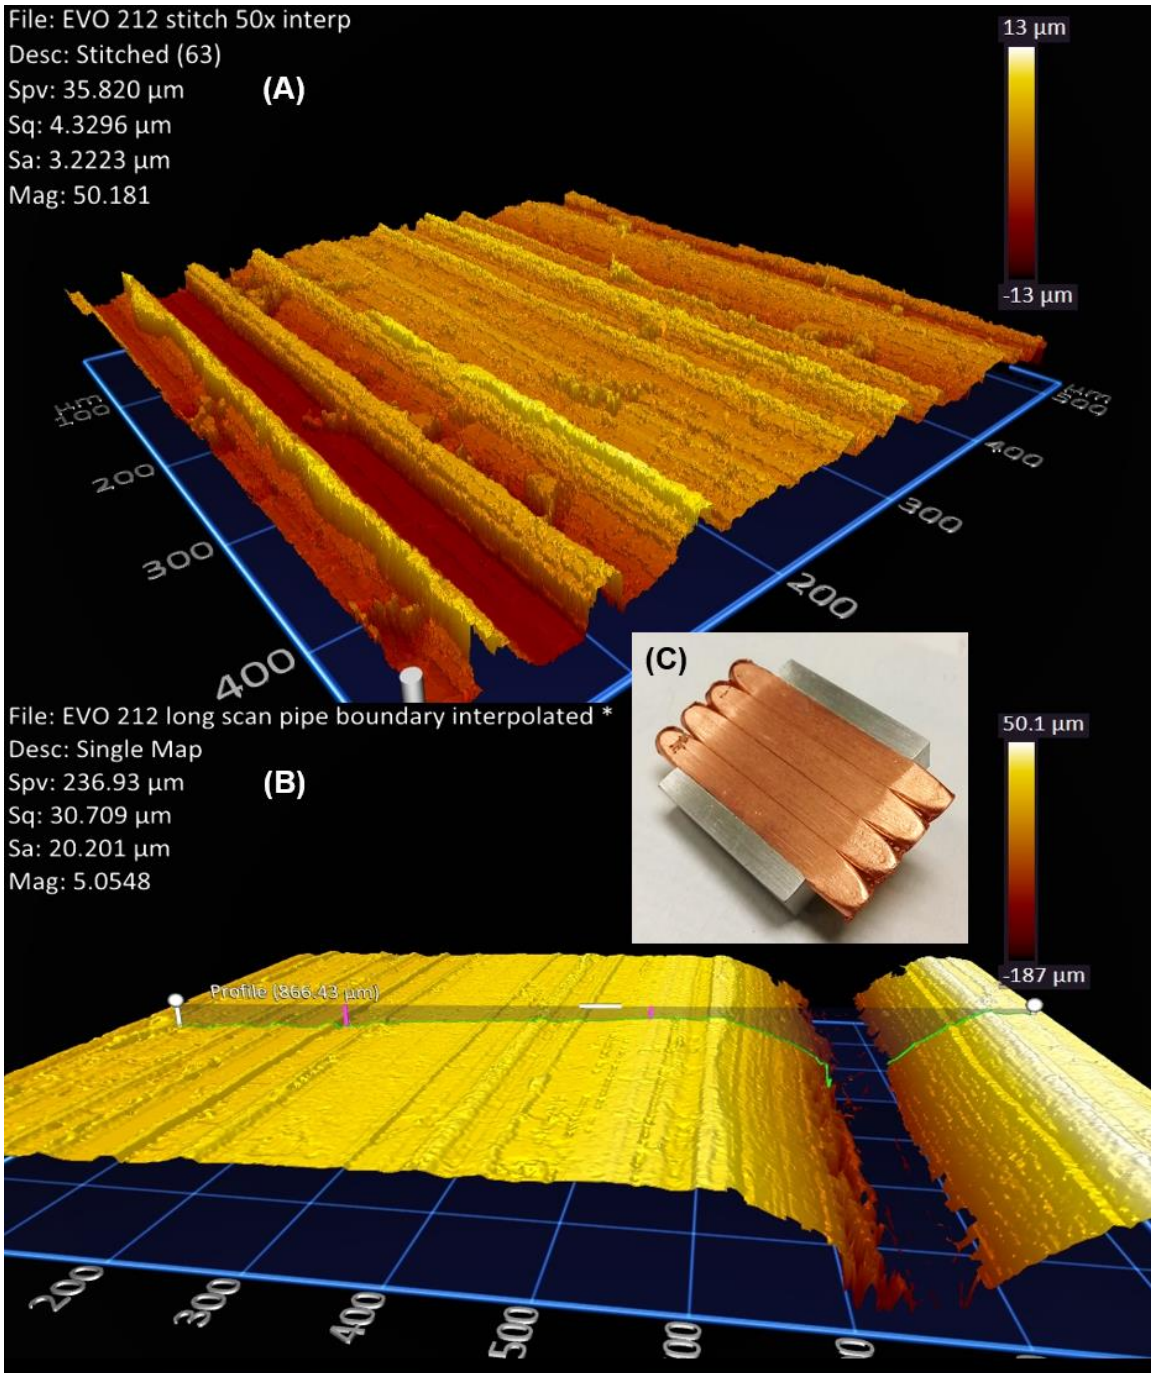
Surface profile of (A) the machined finish and (B) the gap between pipes of the Cooler Master Hyper 212 EVO heat sink along with (C) a photo.
